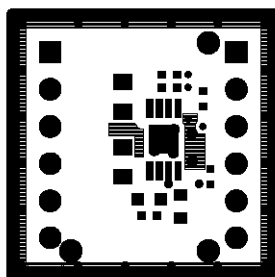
SMP-TPS7A3001-MVK Board Solder Mask – Top Side
